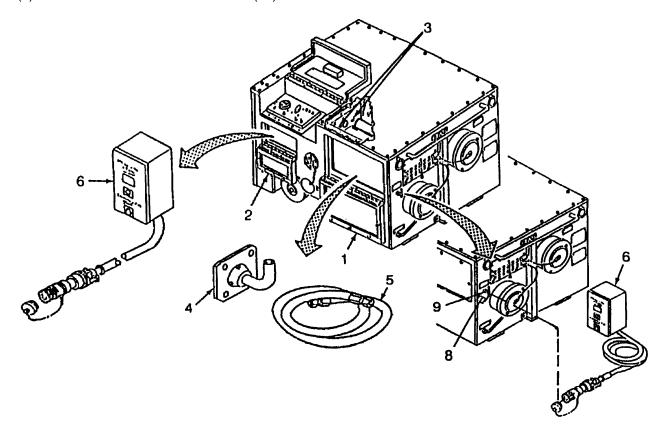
Assembly of Equipment (Sheet 1 of 2)
